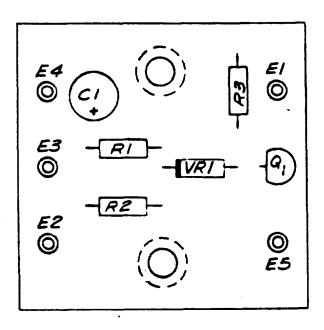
Single Unit Interface PC Board Assembly, Component Locations
